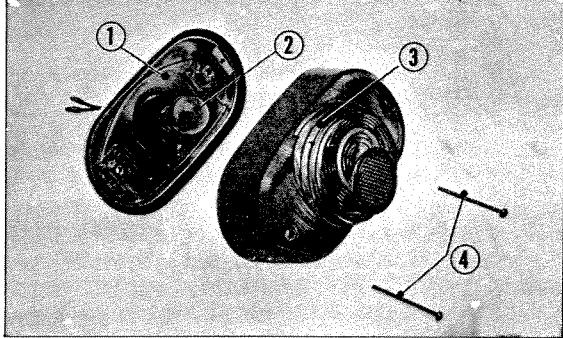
Component parts of head light (CB/CL 175)
